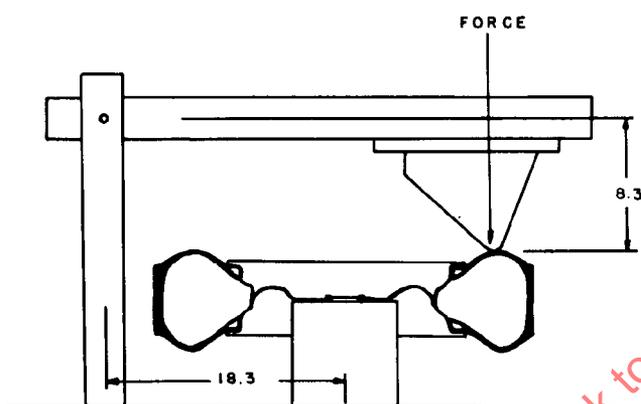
Fixture used to support mounted tire-wheel assembly
